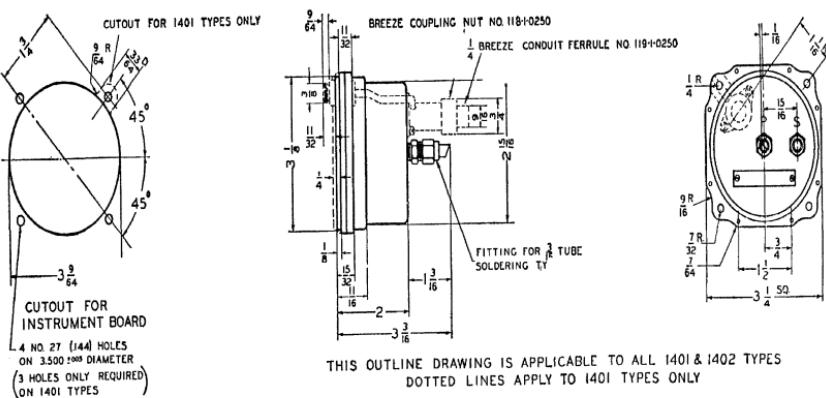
Pioneer Type Pitot-Static Tube Instrument Installation
